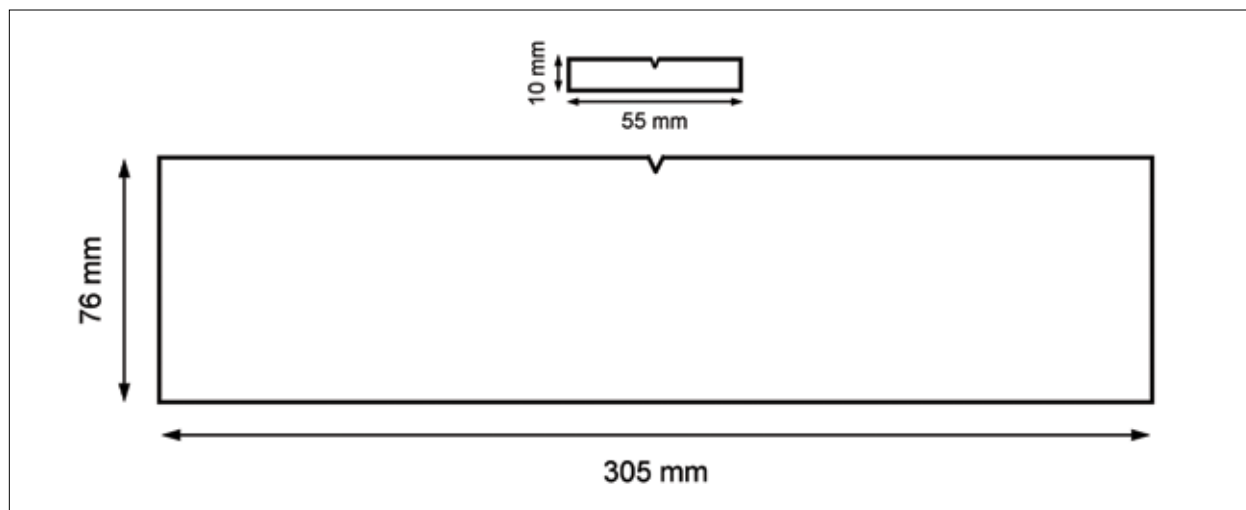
The geometry of a full wall thickness Drop Weight Tear Test specimen (and, to scale, a Charpy V-notch test specimen).
